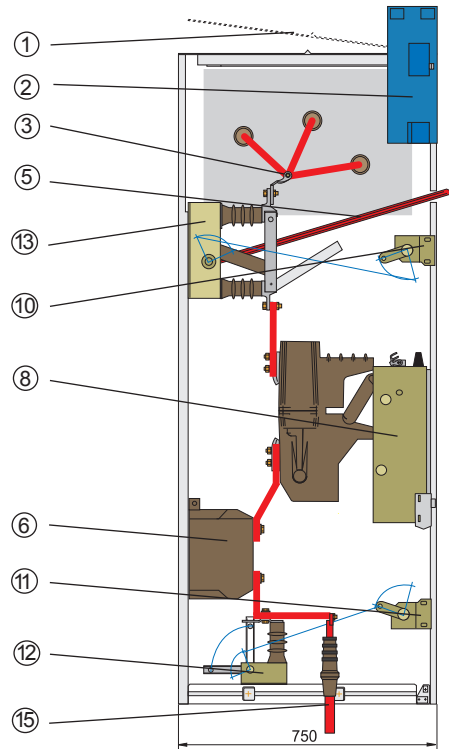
Side view of 12 kV circuit-breaker panel with circuit breaker LS V12-630-20 KUF and disconnecting switch
